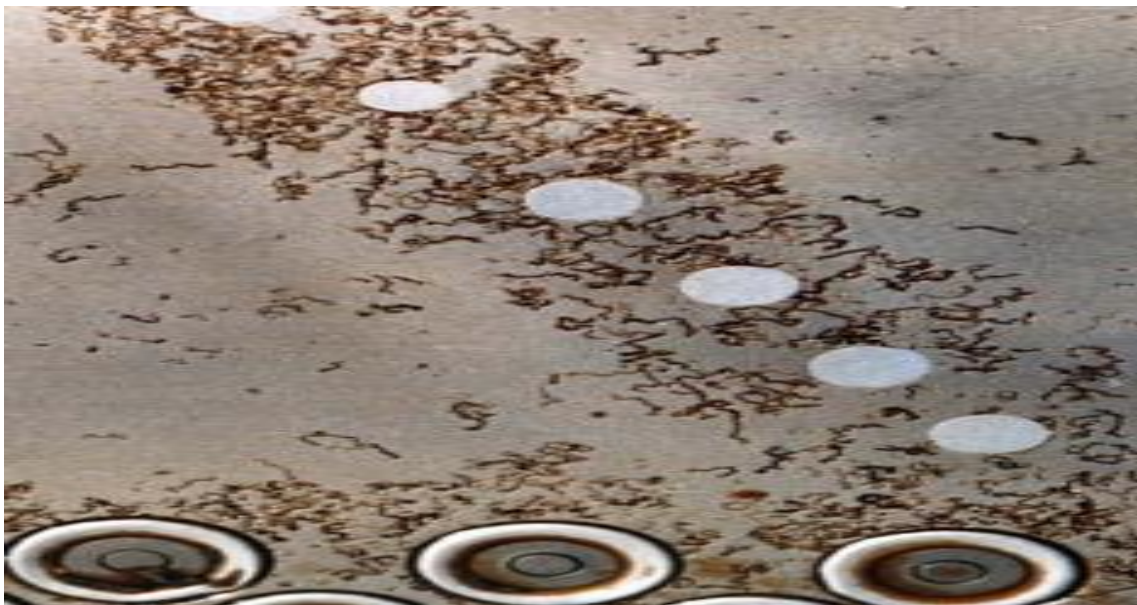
Filiform Corrosion under paint coating on the other parts of the Engine
